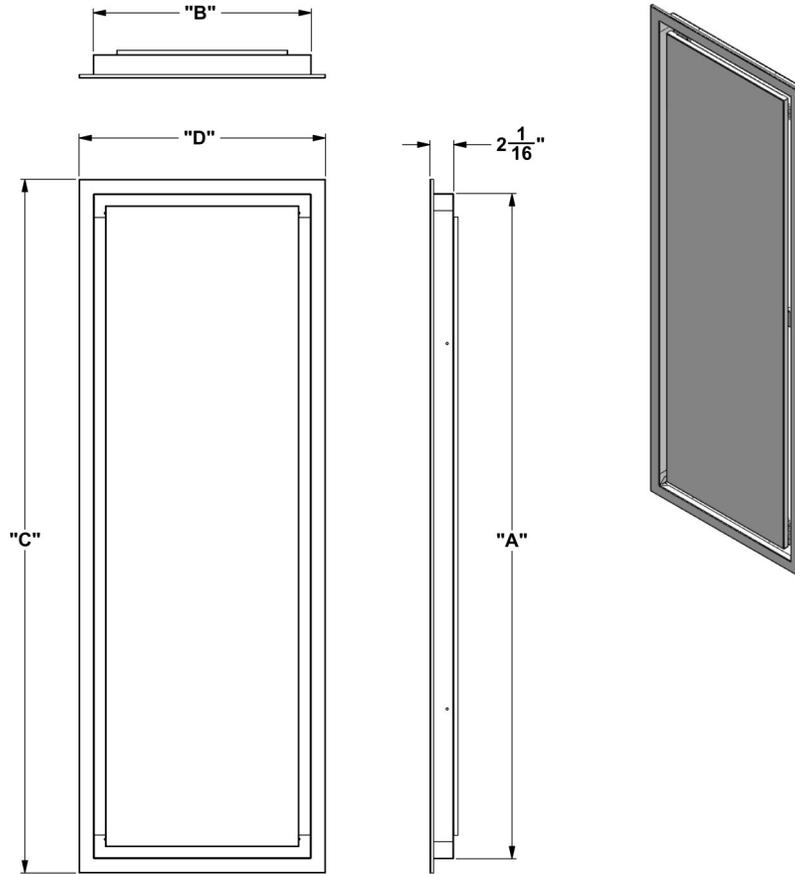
Perimeter Panel Dimensional Drawing
